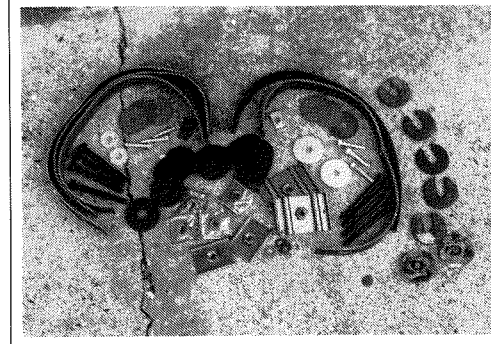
Body mounting kit including the original metal spacers, carefully bagged up after removing the bodywork oh so long ago, plus new bolts, securing plates, rubber mounting pads and sealing strips.
